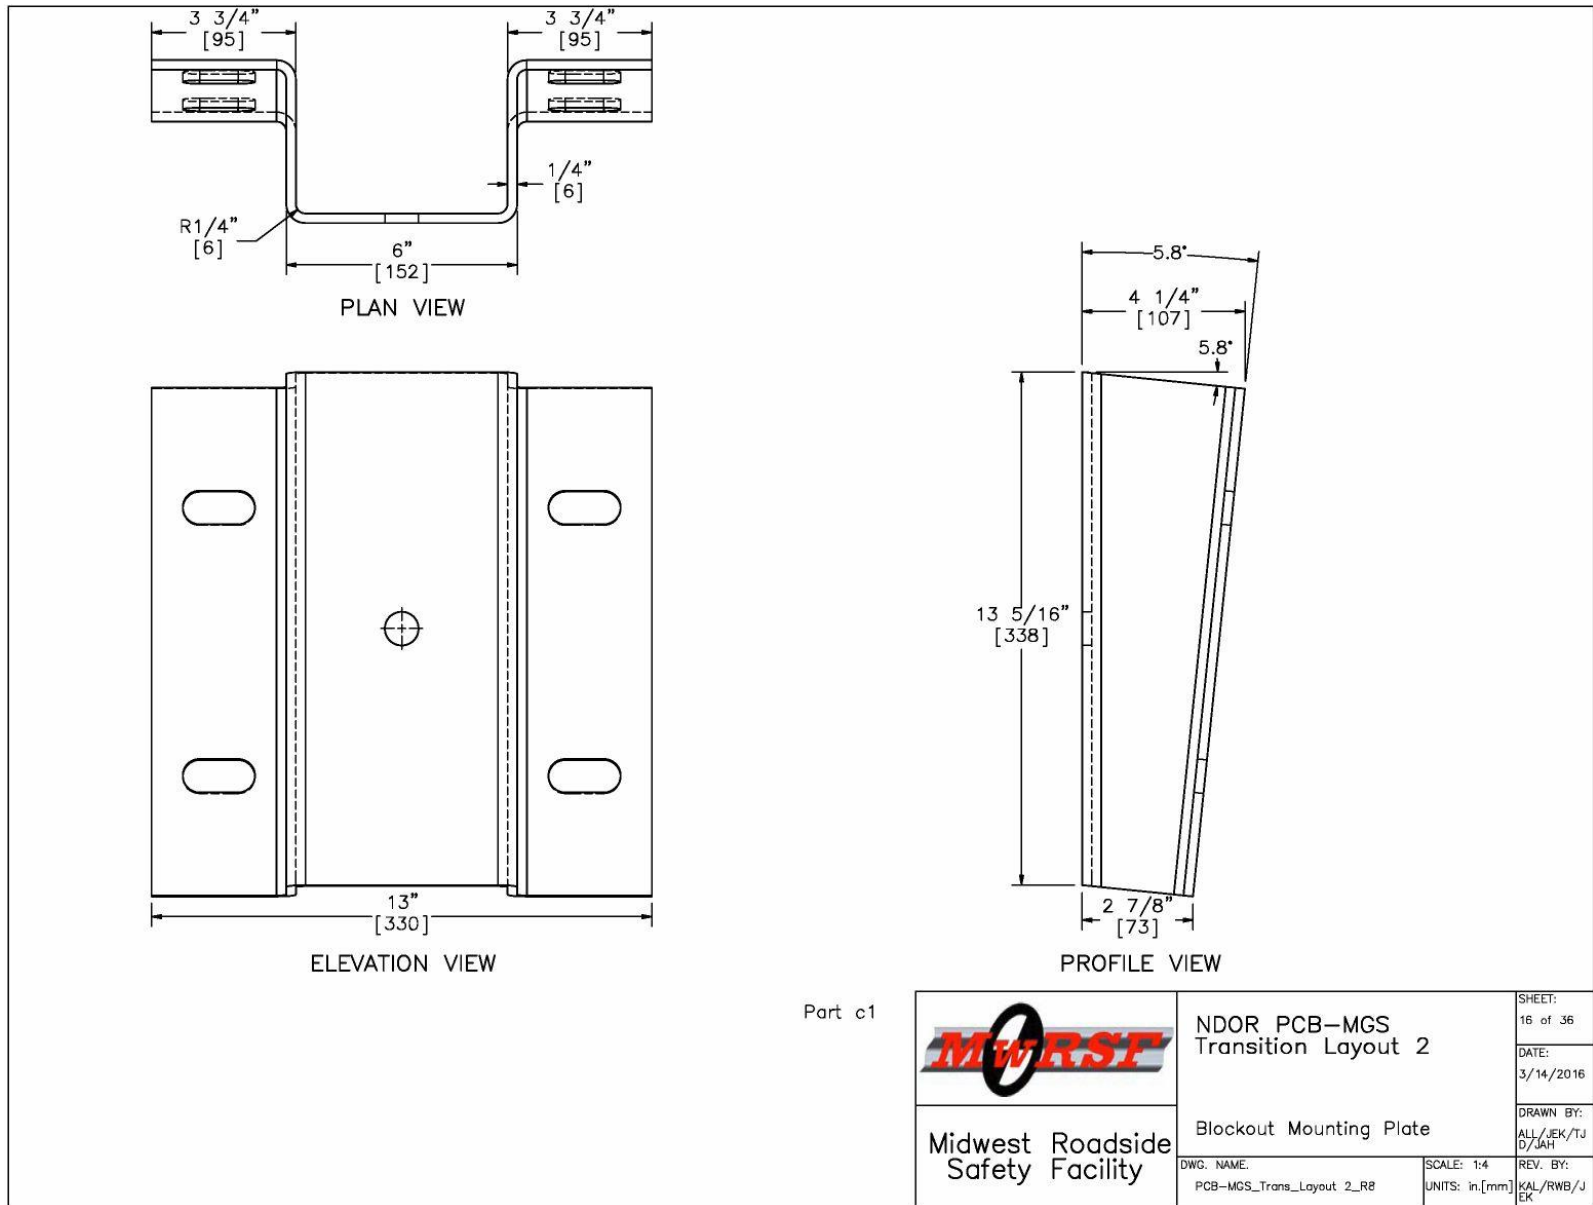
Blockout Mounting Plate, Test No. MGSPCB-1
